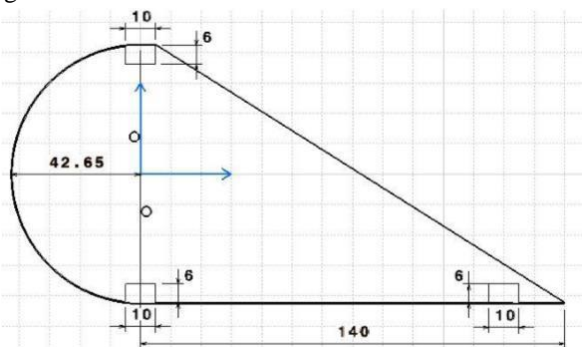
Final shape of the wind turbine blade (dimensions in mm).
